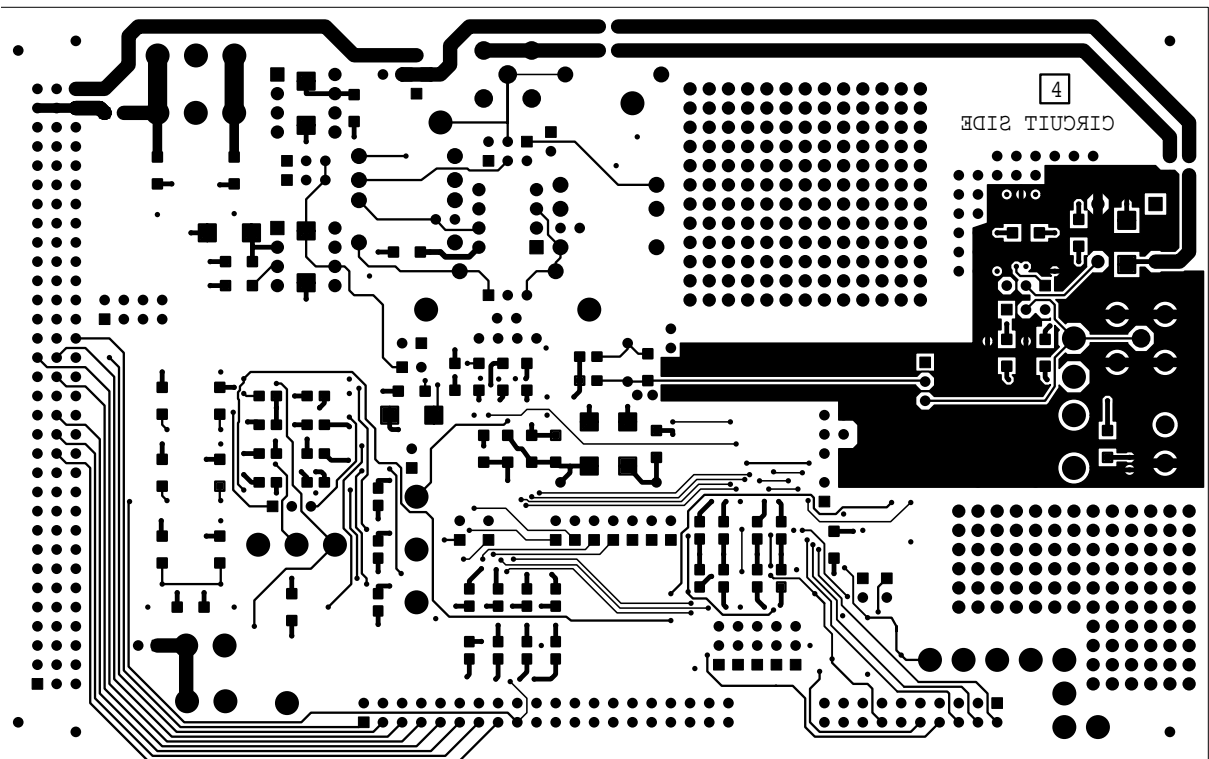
AD7722 Evaluation Board, Solder Side Artwork.
